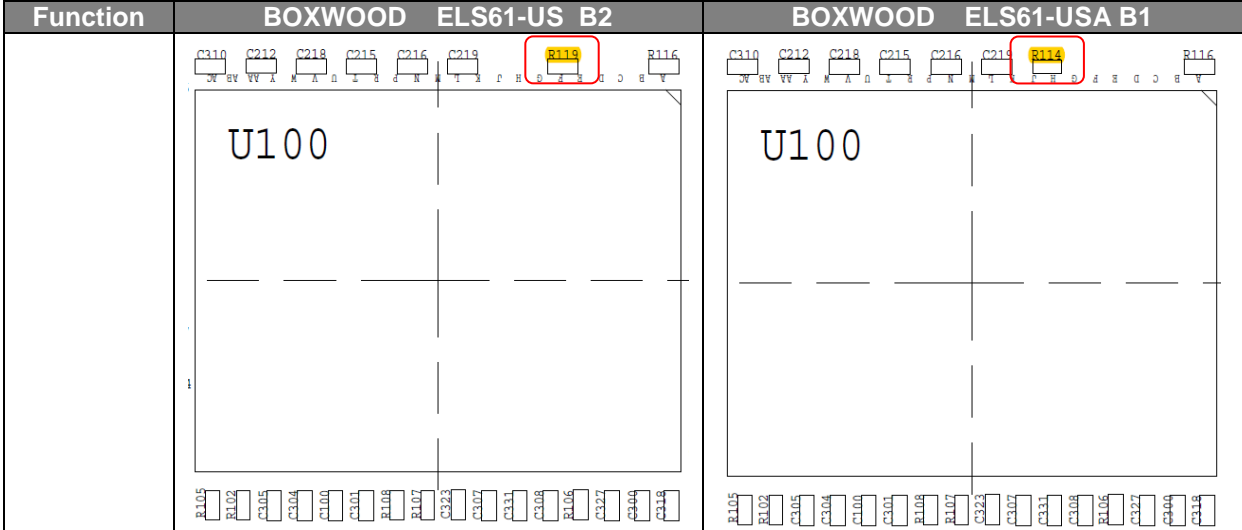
ELS61-USA B1 faceplan assembly parts top view
